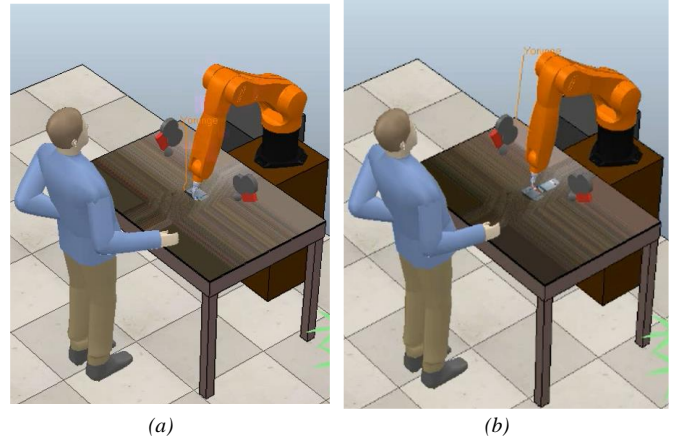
Simulated desired tasks; (a) Sealing process, (b) Welding process
